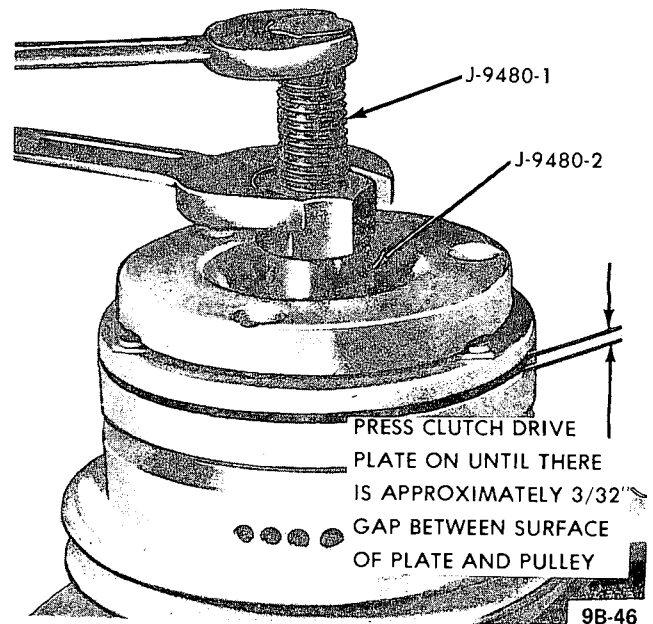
B-70 Installing Clutch Drive Plate - 6 Cylinder Compressor
